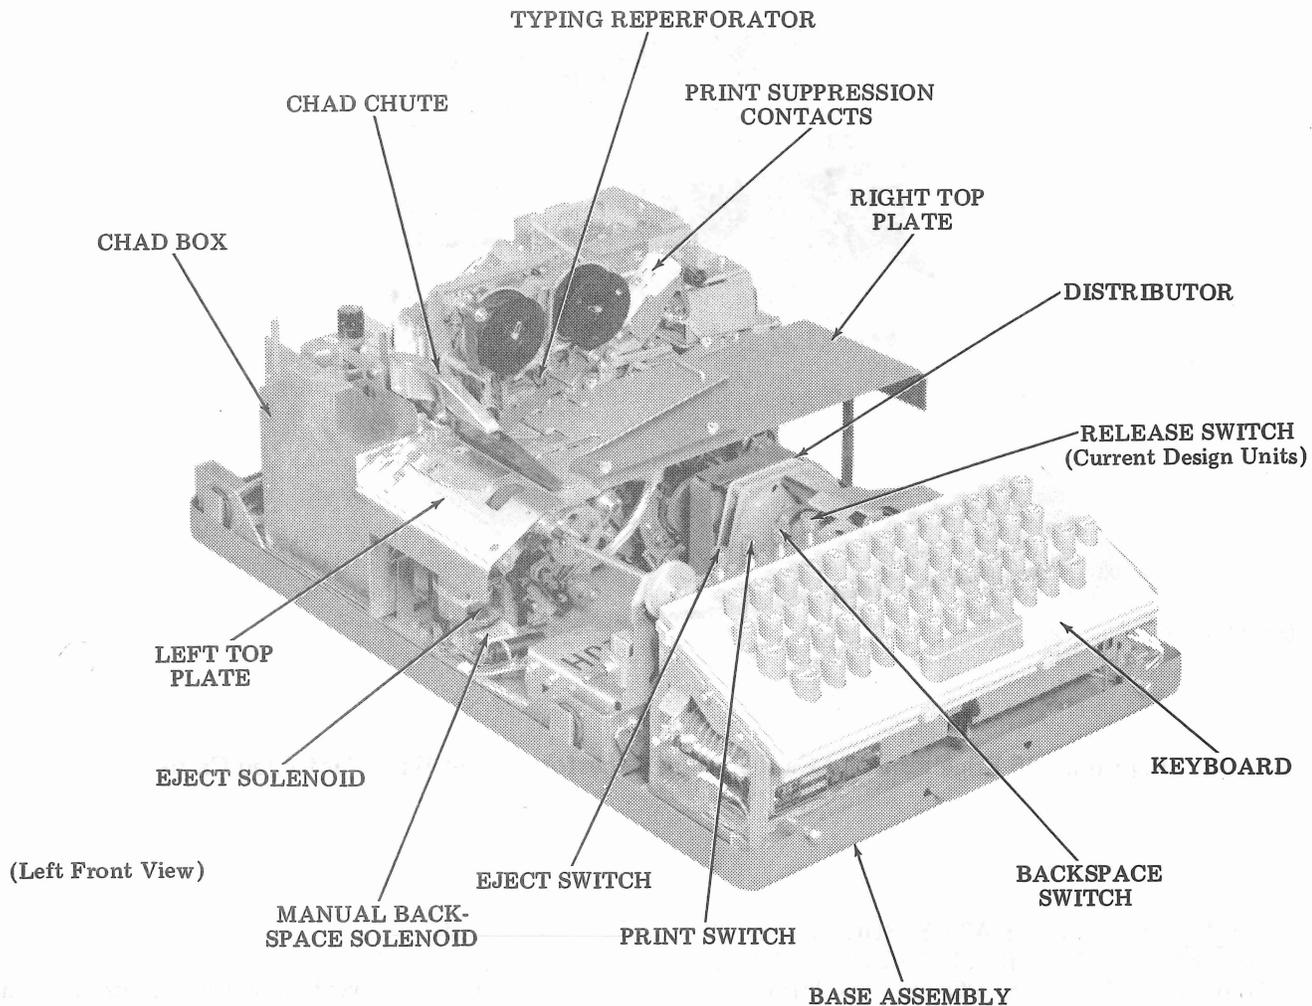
35 Edge Punched Card Typing Reperforator Set Without Cover Assembly
